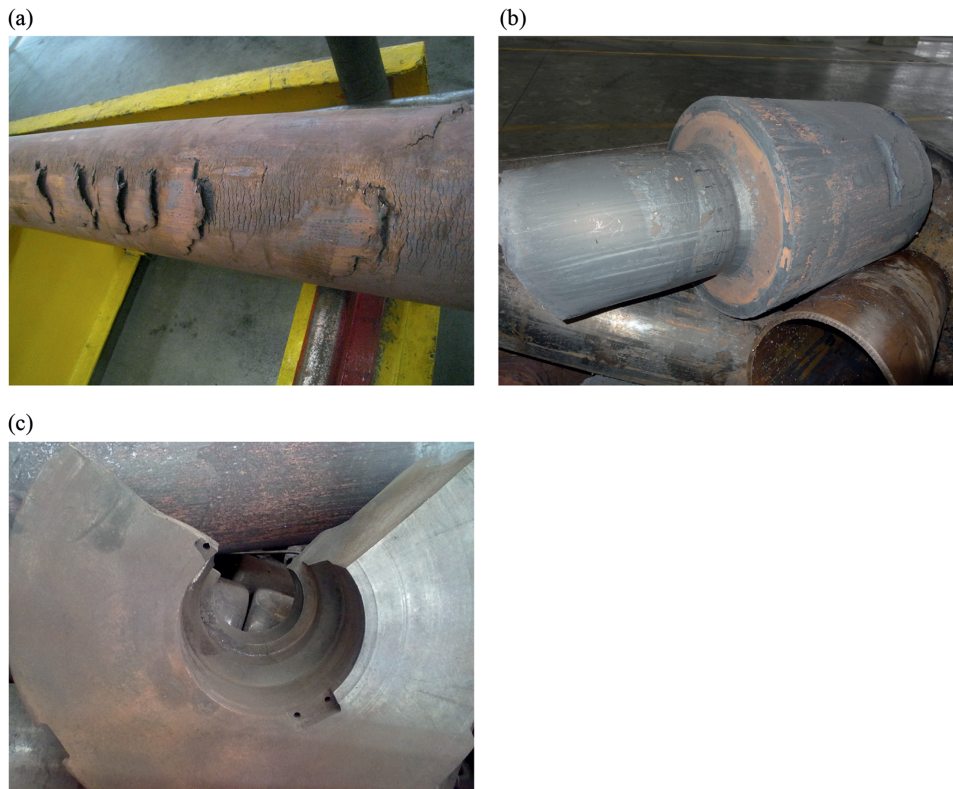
Defect of BFe10-1-2 alloy pipes during hot extrusion (a) surface crack; (b) overload; (c) die fracture.
